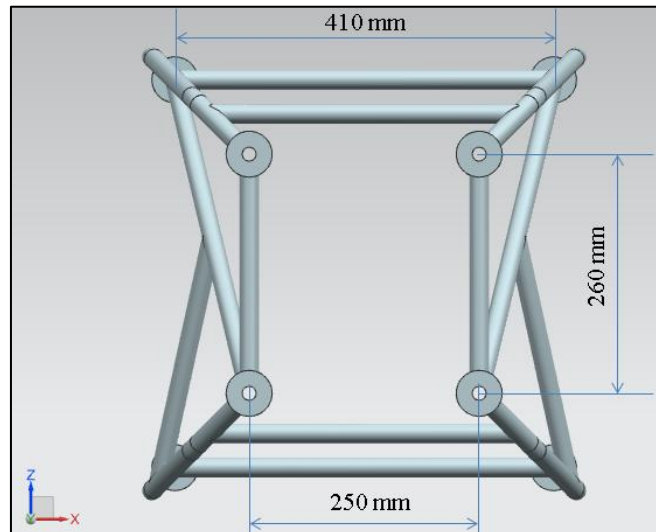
Front View of the Engine Mount Frame CAD Modelled in UGNX 12.0
